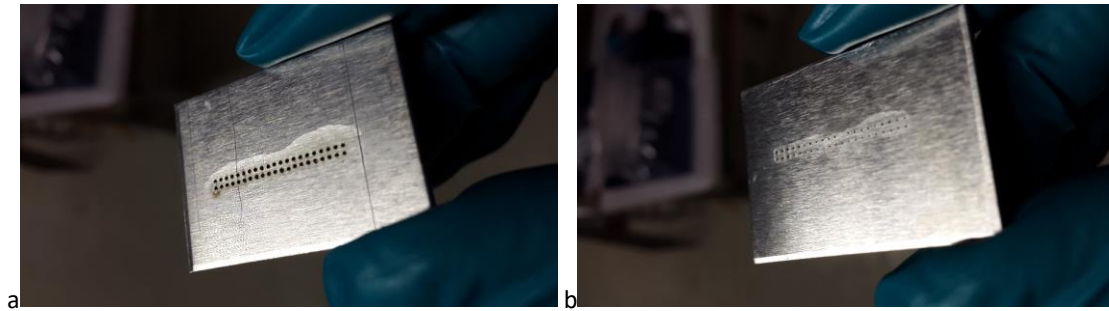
(a) Top view and (b) bottom view of oil-filled conical holes, laser drilled in an Aluminum substrate. To make use of the small exit holes of the laser, the bottom surface of the sample was tested for anti-icing
